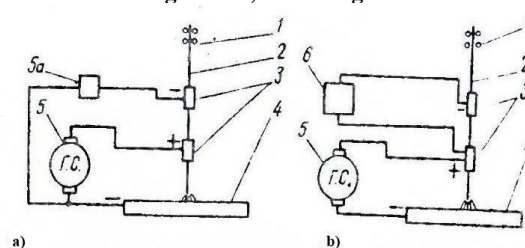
Scheme of welding with preheated wire. a - preheating from the welding generator; b - preheating from the transformer. 1 - feed rollers; 2 - electrode wire; 3 - contact tip; 4 - workpiece; 5 - welding generator; 5a - ballast resistance; 6 - transformer
